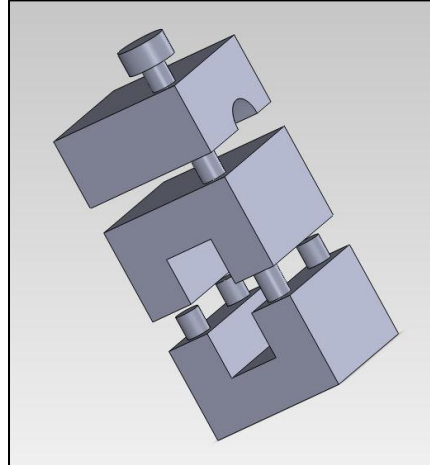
Three Piece "LEGO®" and Screw Clamp (Ring to Rod)
